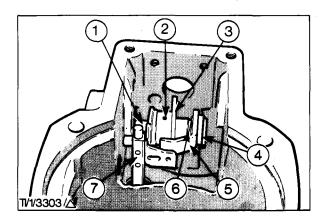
Excess Fuel and Stop Control Shaft Assembly (Dover)
